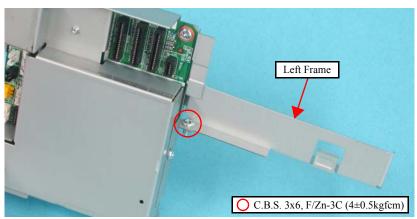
Removing Main Board Unit/Left Frame (4)
